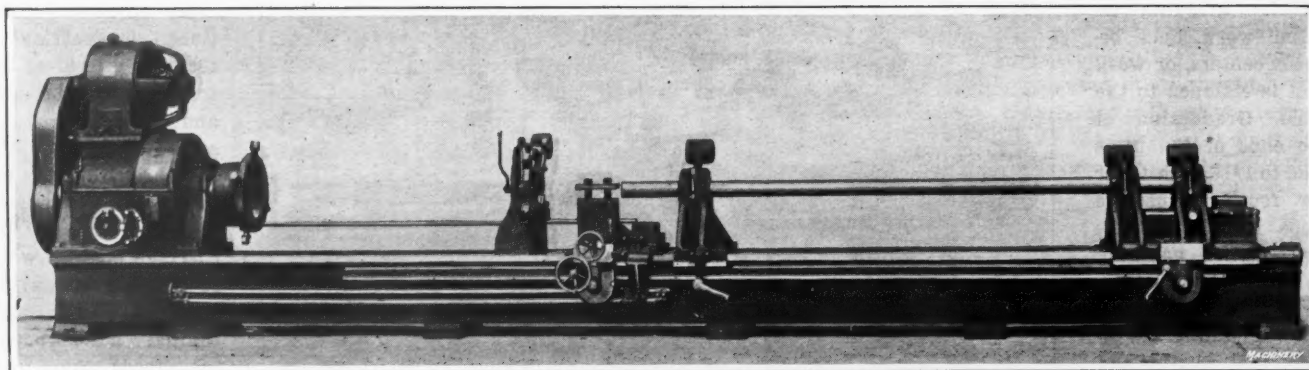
Front View of R. K. LeBlond 38-inch Gun Boring Lathe with 32-foot Bed
